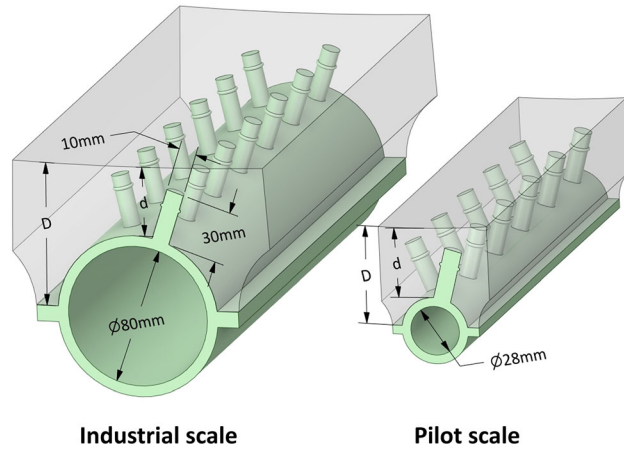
Cooling pipe, anchors, and refractory wall depiction for pilot and industrial scale.
